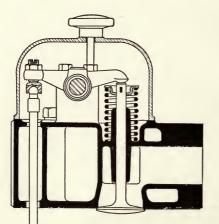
Showing the Method of Operating Valve when Located in Cylinder Head.
